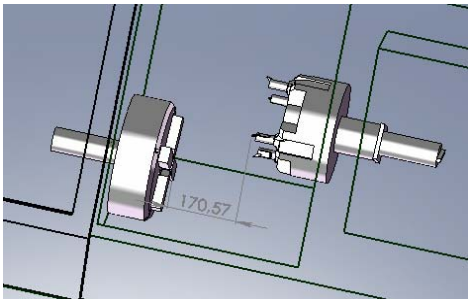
Distance of 170.57 mm between the tool head and fixture head
